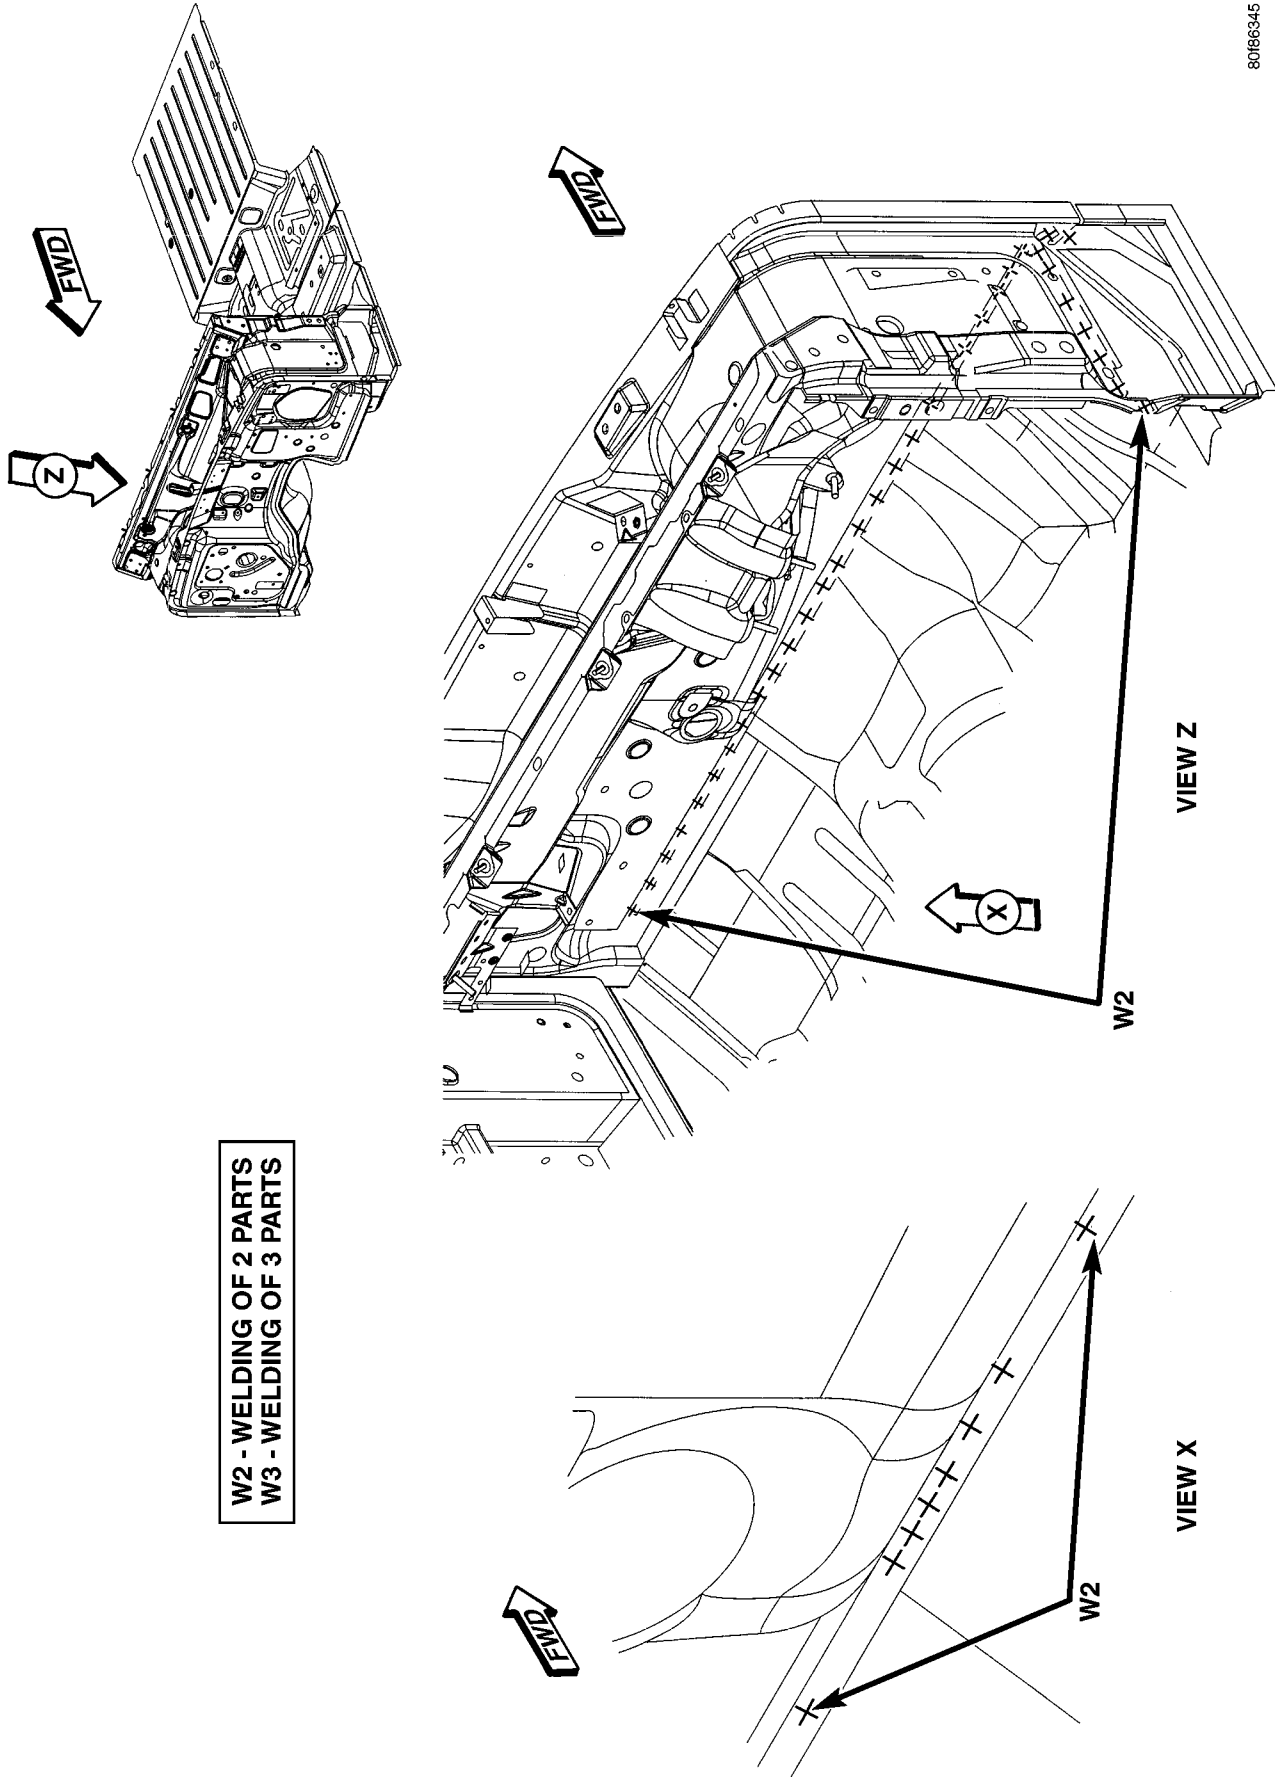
DASH, COWL AND FLOOR ASSEMBLY - RIGHT HAND DRIVE
